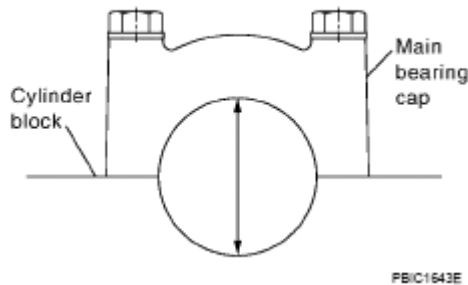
Identifying Inner Diameter Of Main Bearing Housing
